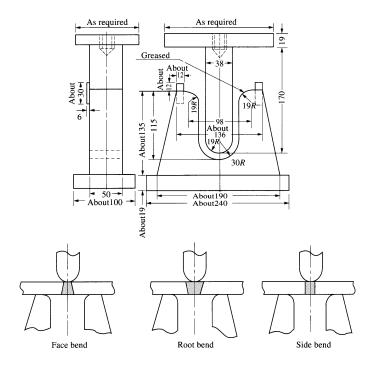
Guided Bend Test Jig (Unit: mm) (For bend test specimen of 3.2 mm in thickness)
